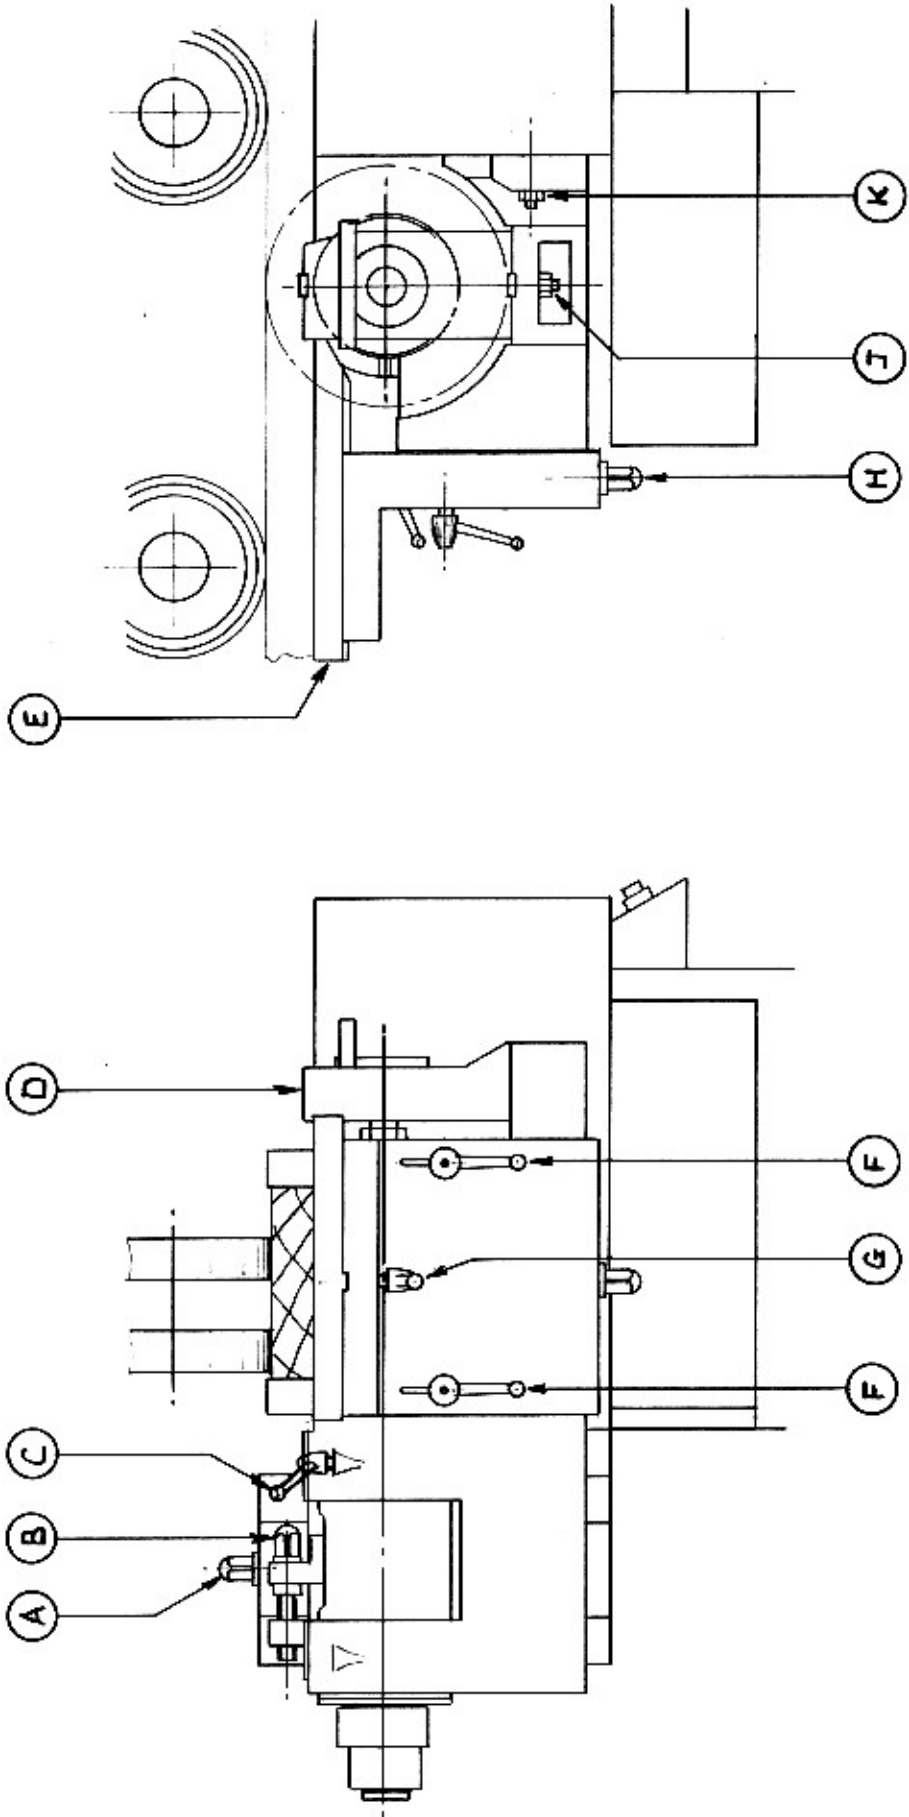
SECOND BOTTOM HEAD AND OUTFEED TABLE
